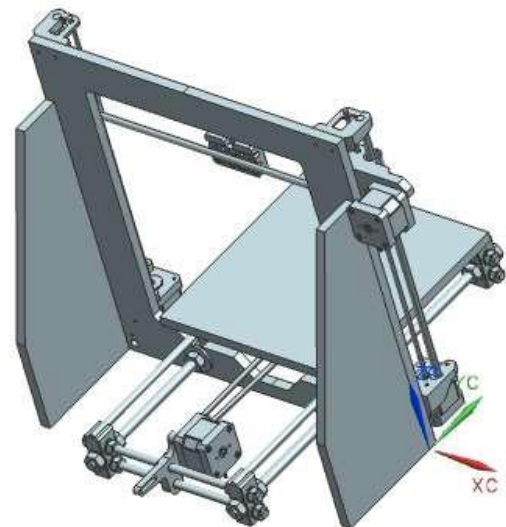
Front Isometric View in assembled state of the 3D printing Device
